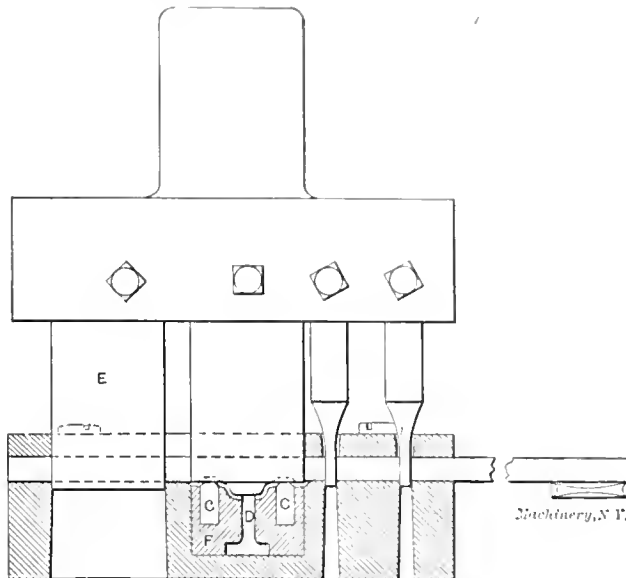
Progressive Punch and Die for Forming Plates shown at A in Fig. 1.
